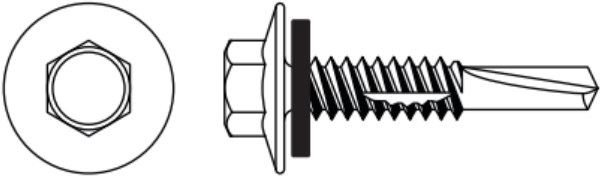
(B) FLANGE HEAD WITH CAPTIVE WASHER
